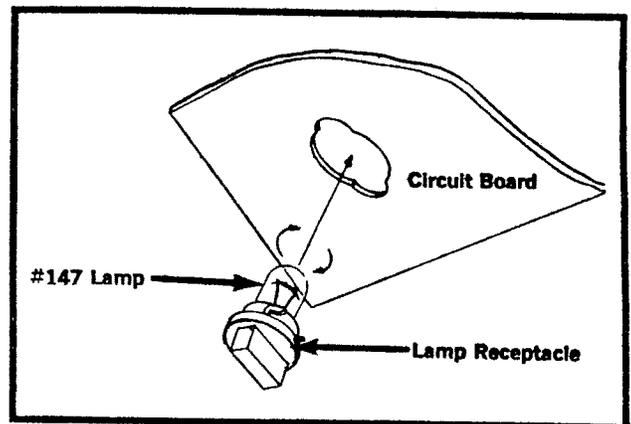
PC board lamp replacement. Turn the lamp assembly counterclockwise to remove and clockwise to install.
